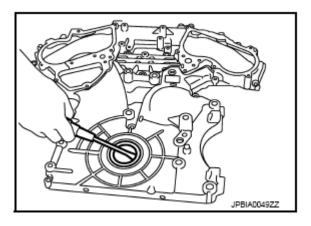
Removing Front Oil Seal From Front Timing Chain Case Using Screwdriver Courtesy of NISSAN NORTH AMERICA, INC.
